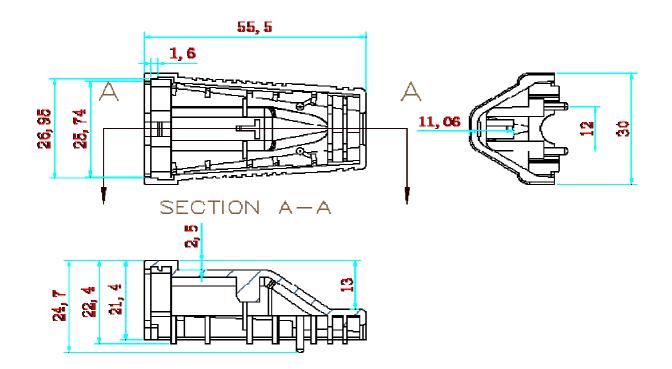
Engineering dimension drawing for outer enclosure for cord connector KT101A (unit:mm)
